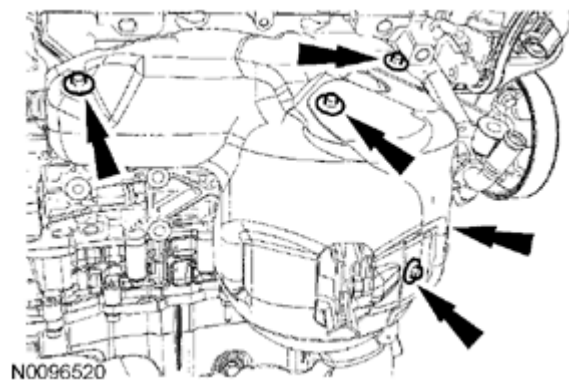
Locating Bolts And RH Exhaust Heat Shield
